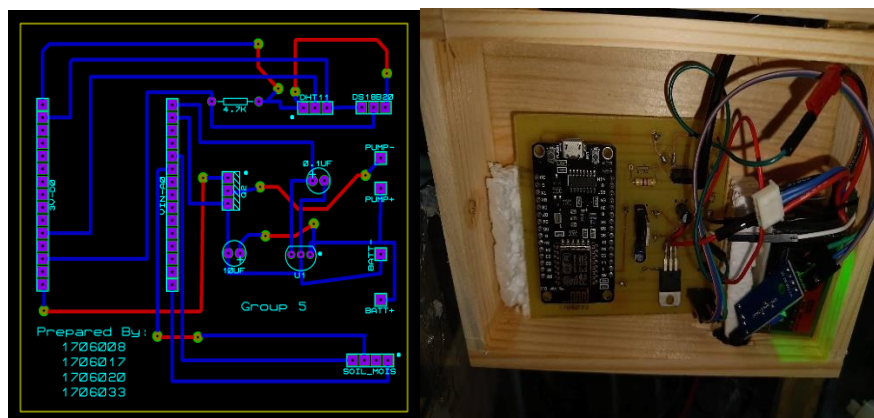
(Left) PCB Layout and (Right) Implementation of Design for Board 1
